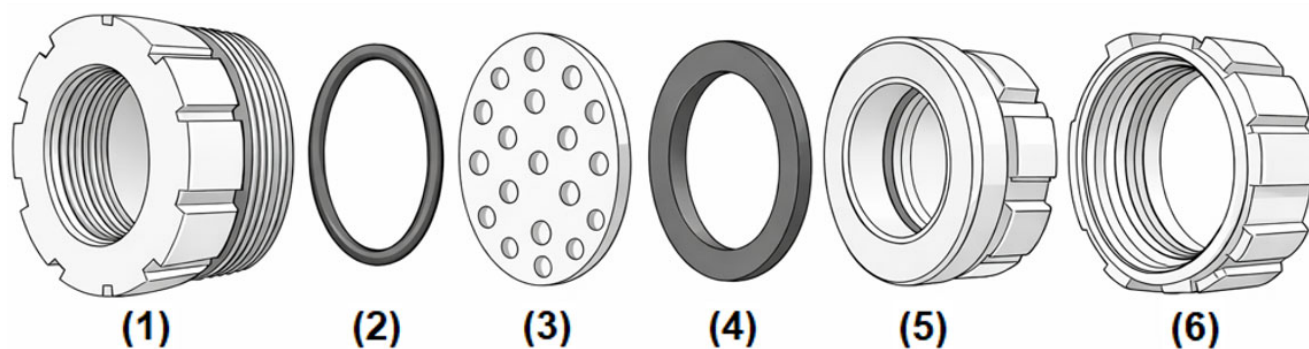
Exploded view of the cavitator device with universal joint. From left to right: (1) threaded bushing, (2) O-ring, (3) orifice plate, (4) gasket, (5) unthreaded bushing, and (6) nut with internal thread.
